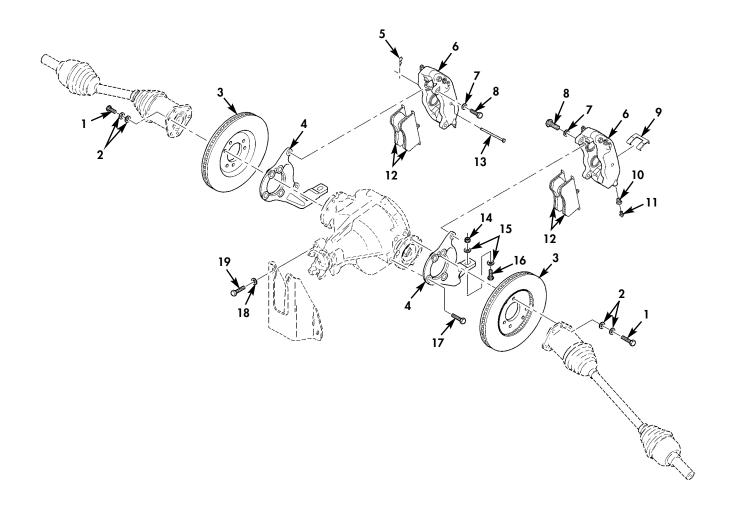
Front Service Brake Caliper Assembly and Rotor (Serial Number 300000 and Above).
